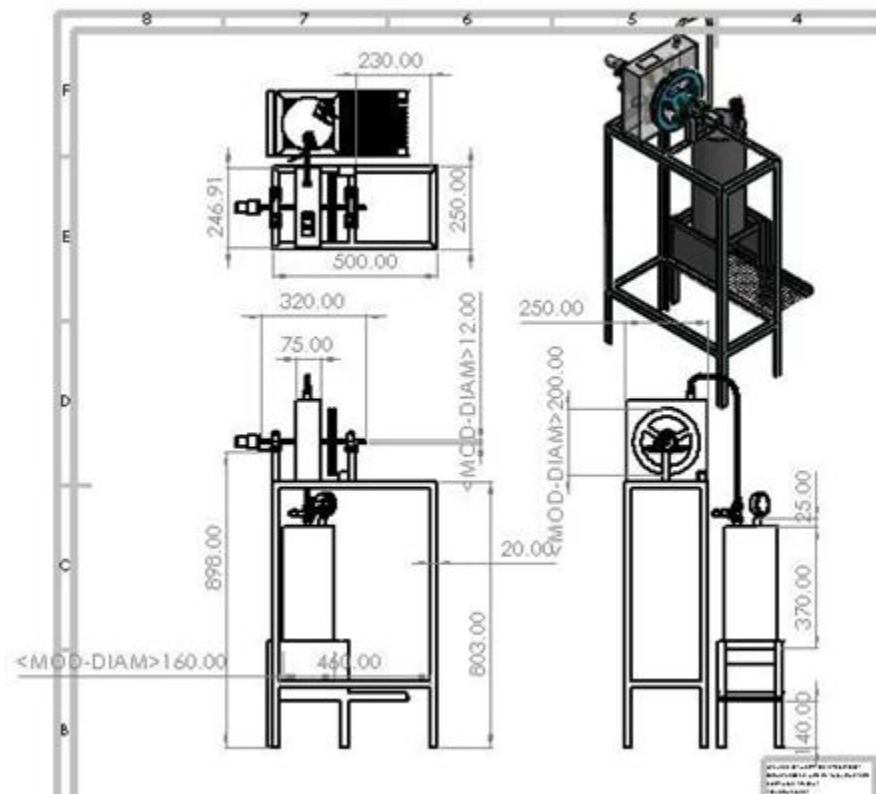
Comprehensive 2D engineering drafting with manufacturing dimensions.
